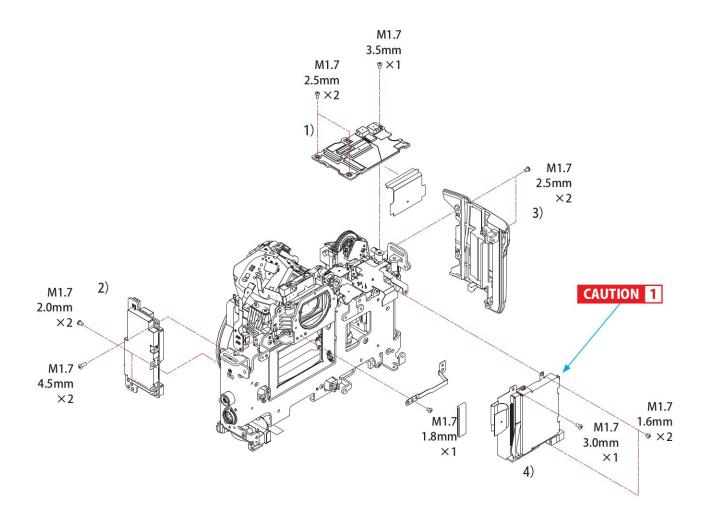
LPU PCB / DC/DC PCB / CF Slot Cover / CF Slot Ass'y Removal
